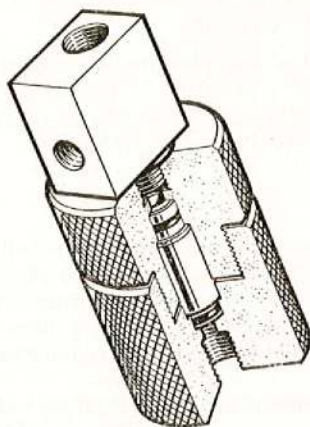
Pressure testing the pressure-raising valve (fixture T.237421)
